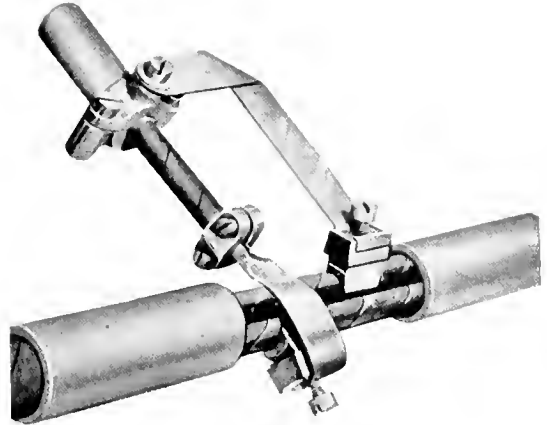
View Showing Method of Attaching Special Connecting Clips
